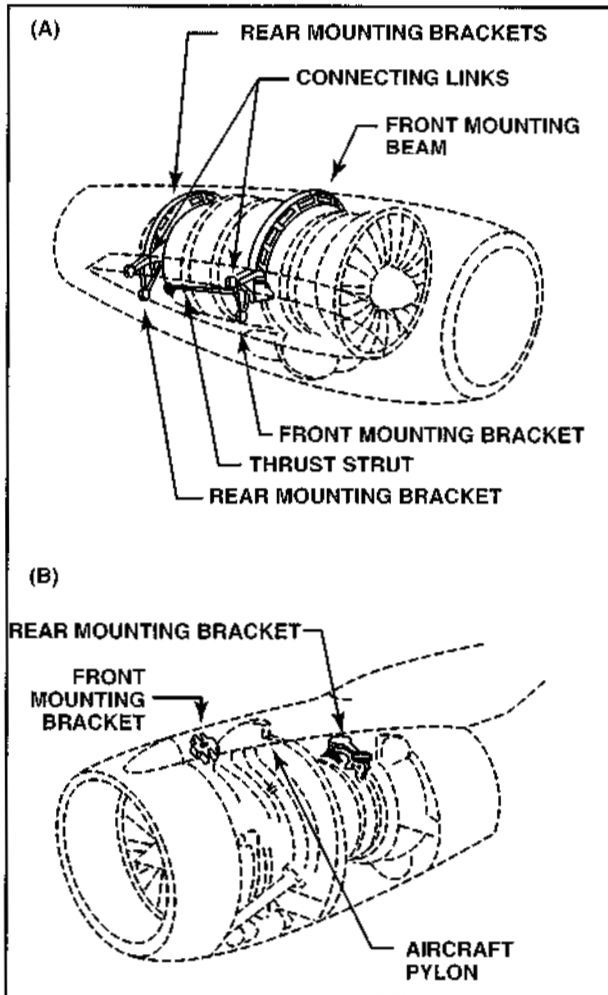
(A) Many business jet aircraft have engines mounted on short thrust struts extending from the sides of the aft fuselage. The thrust struts support mounting brackets and beams with attachment points for an engine. (B) Large transport category aircraft with engines mounted on wing pylons typically have mounting fixtures that support the engine at the front and rear.
